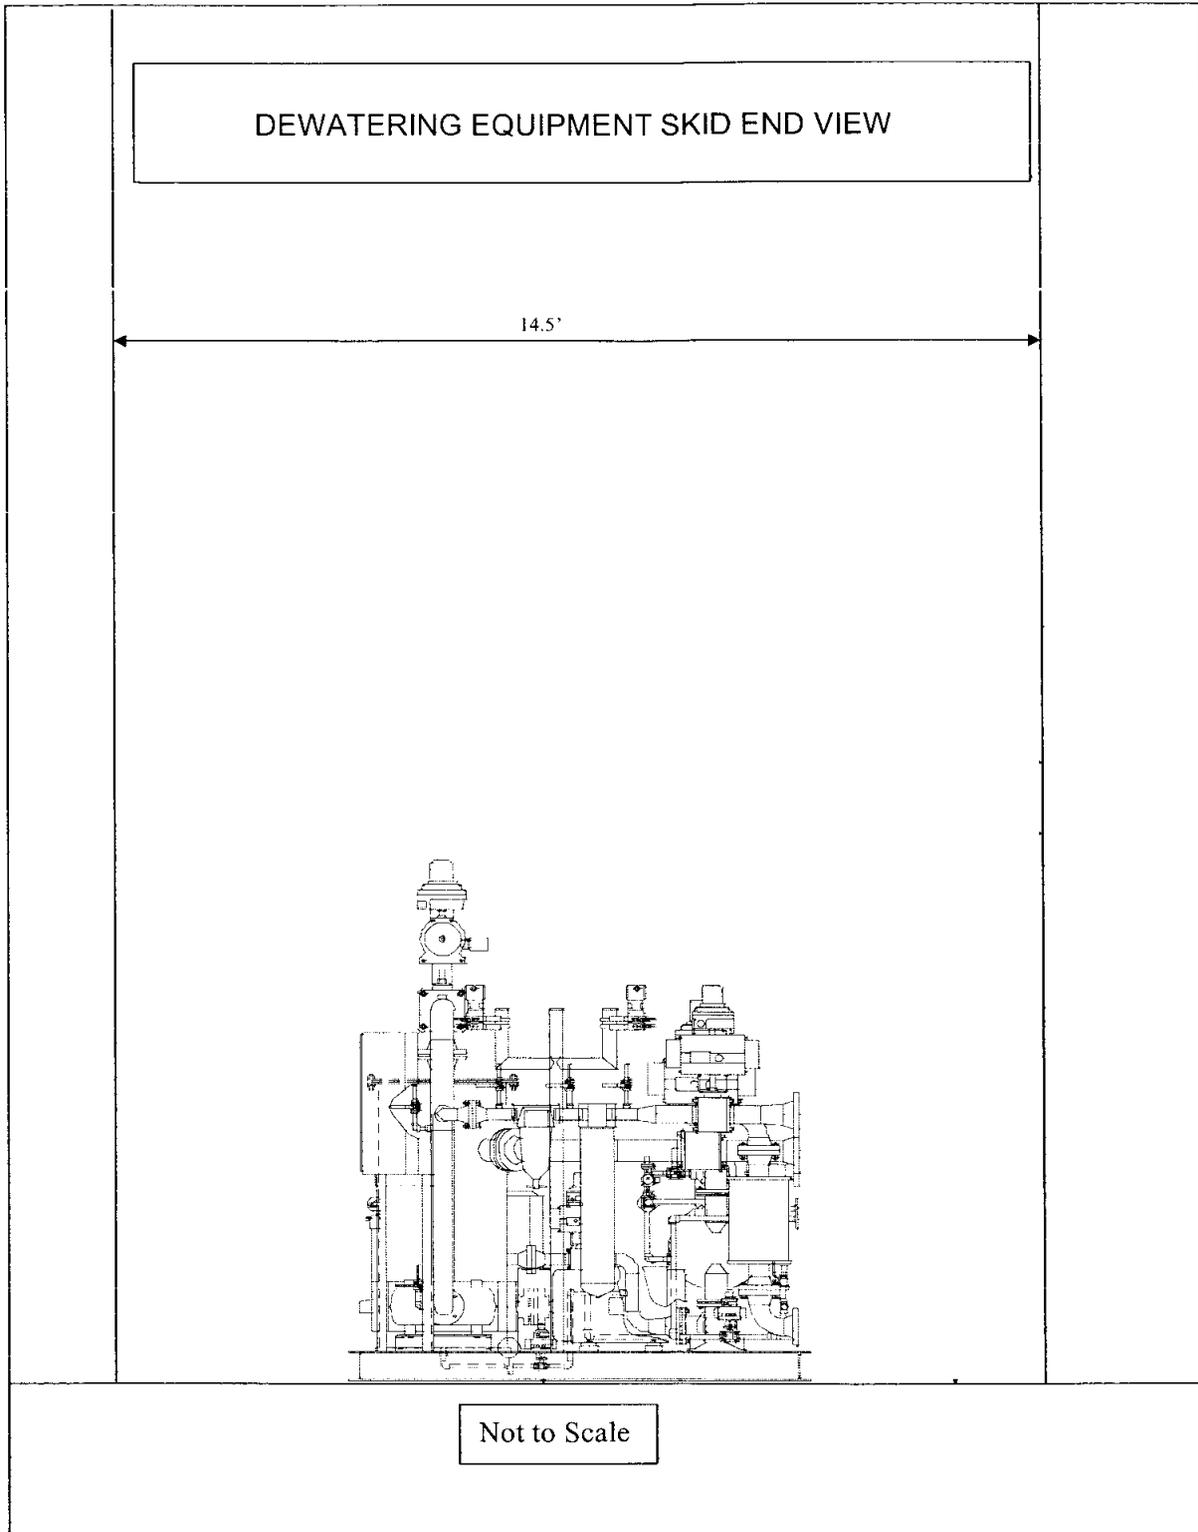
Dewatering Skid Location Along South Wall in Room P-0119
